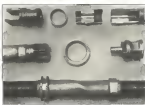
End fittings for drag and bracing tubes, characterizing the design of wing ribs.
